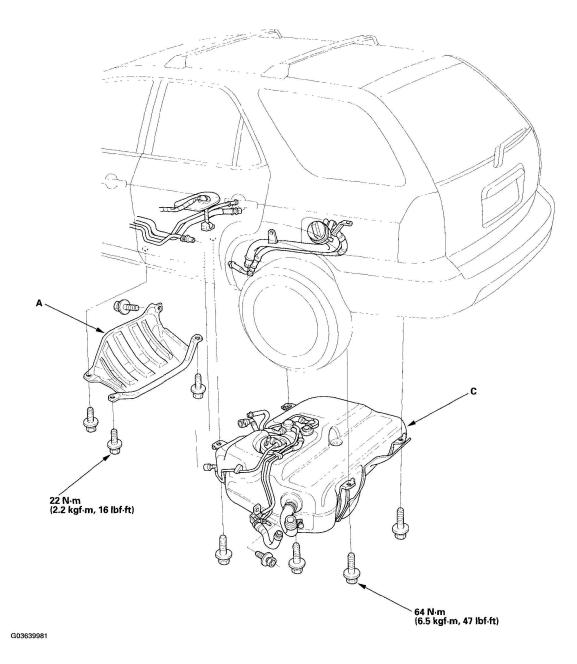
Exploded View Of Fuel Tank (2003-04 Models) Courtesy of AMERICAN HONDA MOTOR CO., INC.
